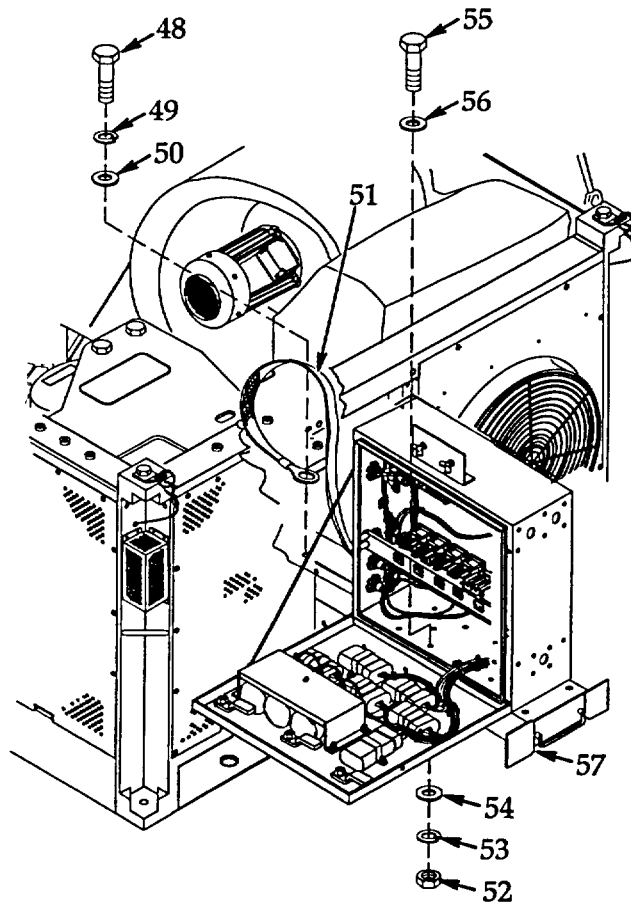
Power Box Assembly (Sheet 2 of 2).
